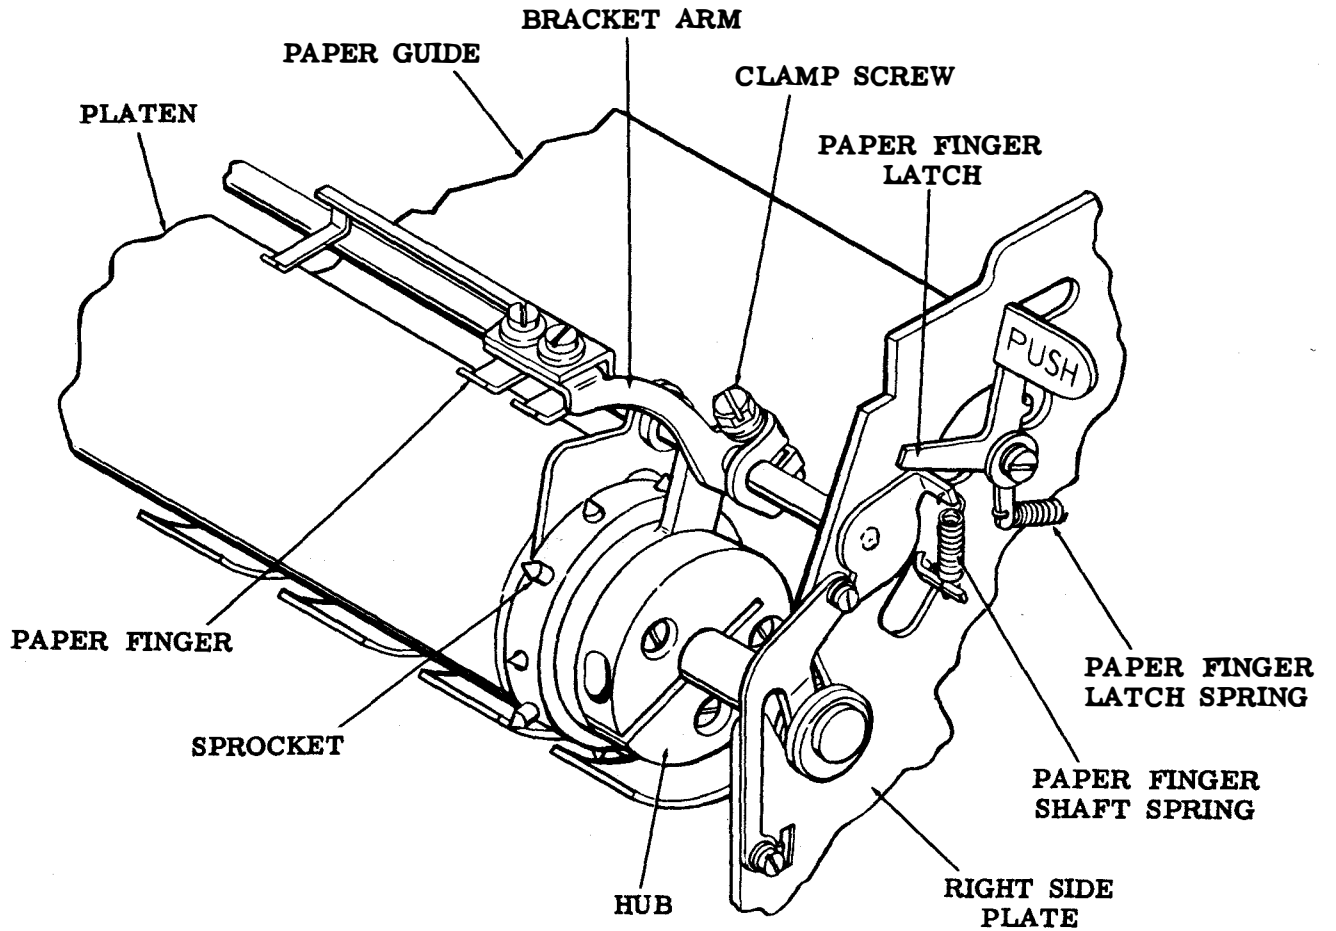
Friction Feed Platen Mechanism, Right Front View
